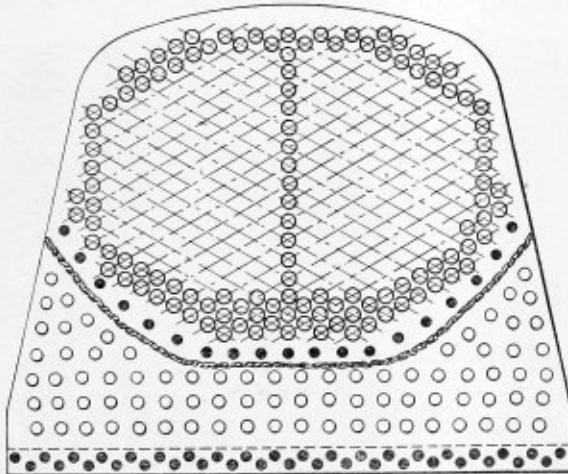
Method of Applying New Tube Sheet Section; Gas or Electric
